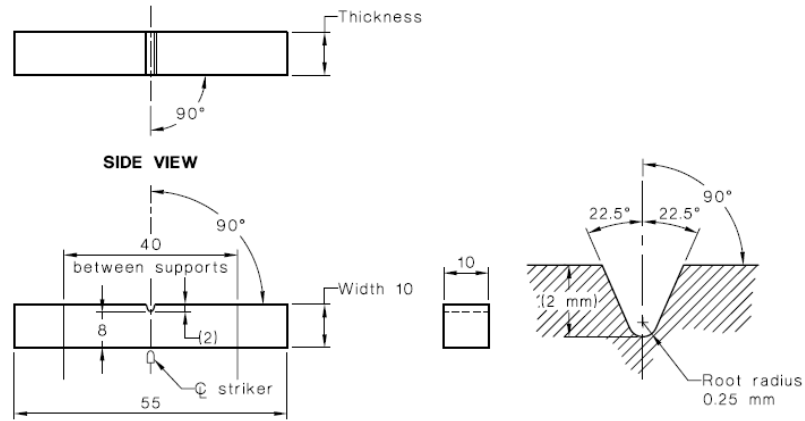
Scheme of a standard Charpy impact test sample [9].
